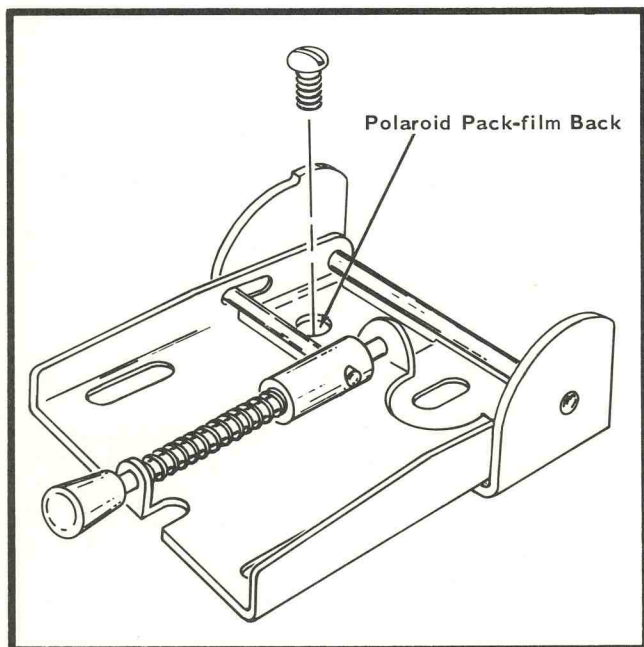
Selecting proper mounting hole in Power Supply Mounting Bracket.
